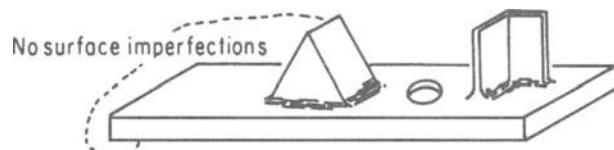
Gates and ejector pins create marks and blemishes. To aid in properly locating gates and ejector pins, parts drawings should indicate surfaces that can be marred without creating problems.
